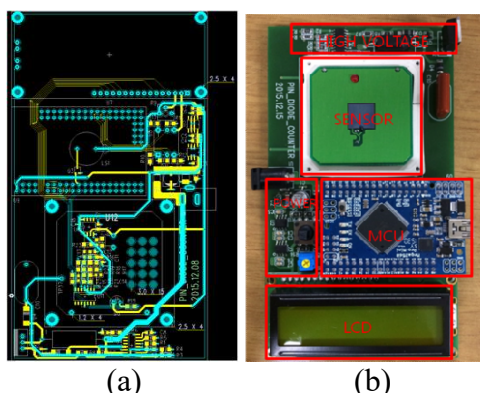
PCB layout (a) and assembled PIN photodiode radon counter (b)
